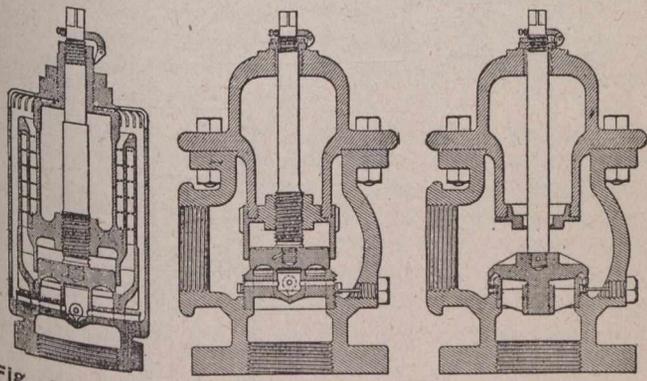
Muffled Locomotive Type. Fig. 2.—Flat-seat Inspector Type. Fig. 3.—Bevel-seat Inspector Type.
